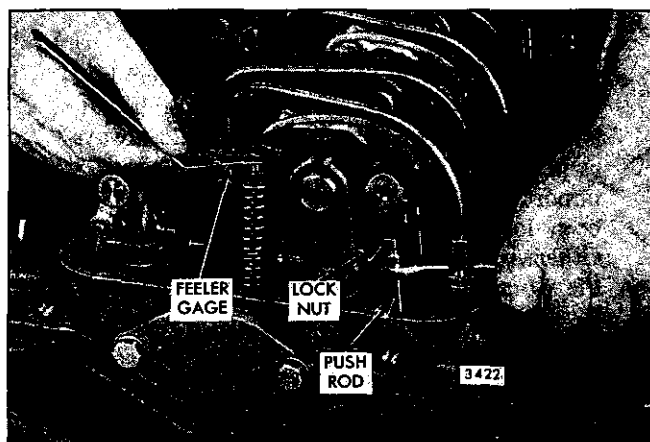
Adjusting Valve Clearance (Two Valve Head)
